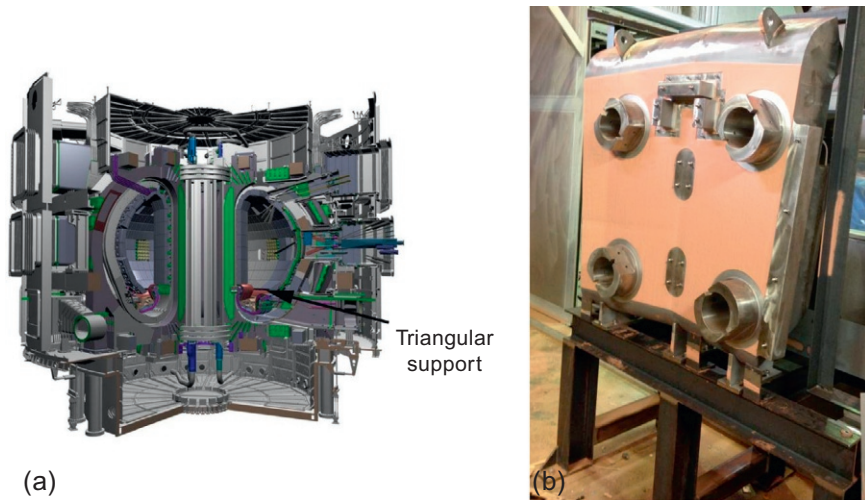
Manufacturing triangular support of ITER Vacuum Vessel with cold-sprayed technology. (a) ITER Vacuum Vessel. (b) Cold-sprayed triangular support.
